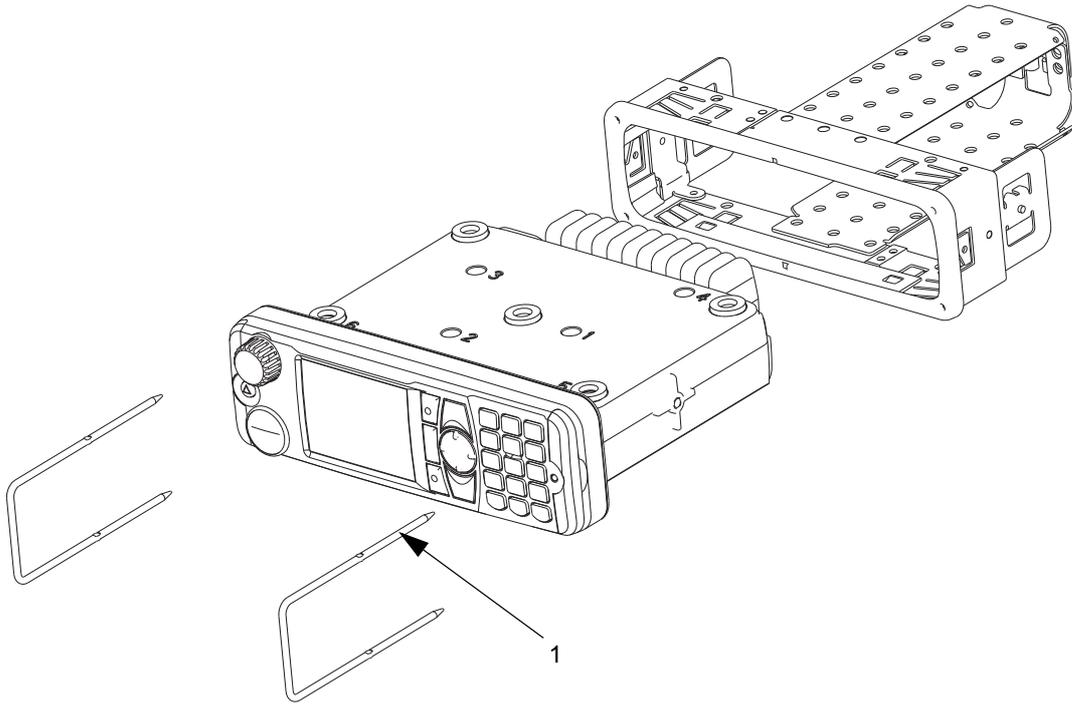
Mounting the Radio into the Frame (Shown with Enhanced Control Head)
